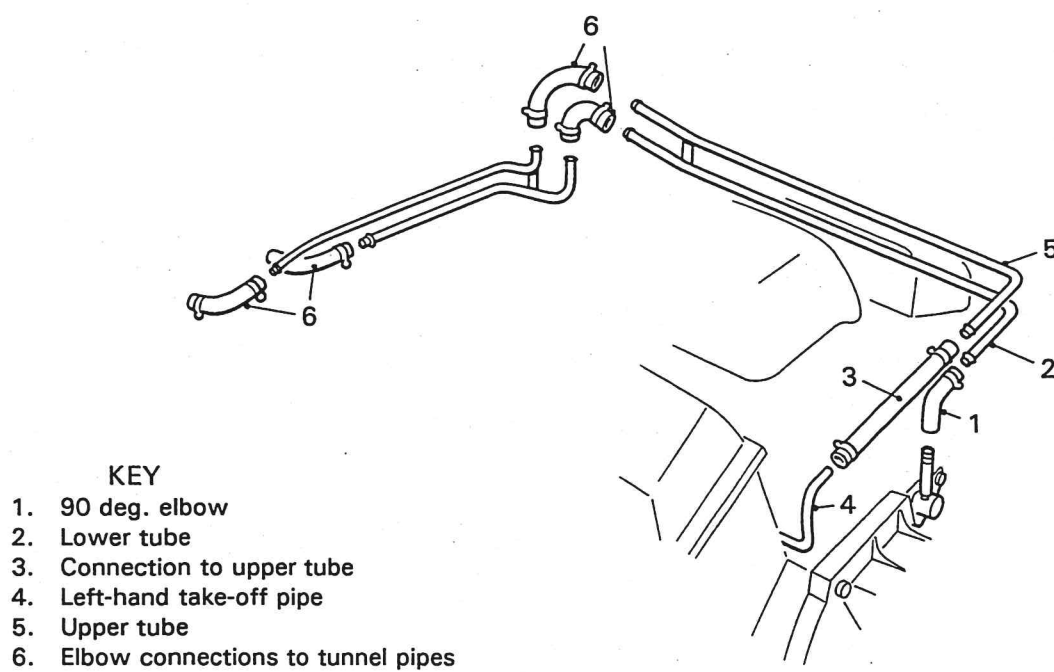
Rear of Engine - Heater System Take-off Pipes
